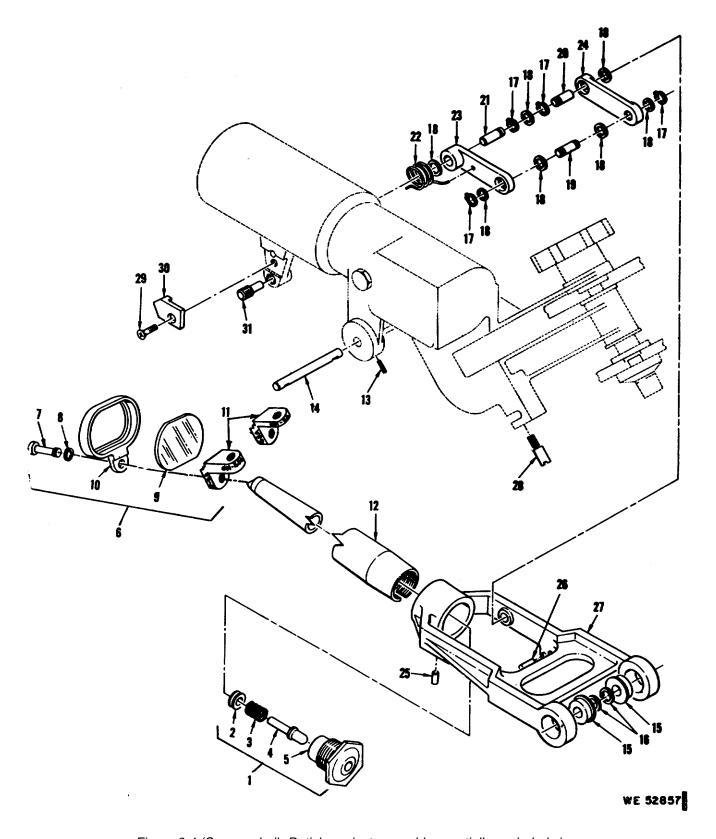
(Superseded) Reticle project assembly—partially exploded view.
